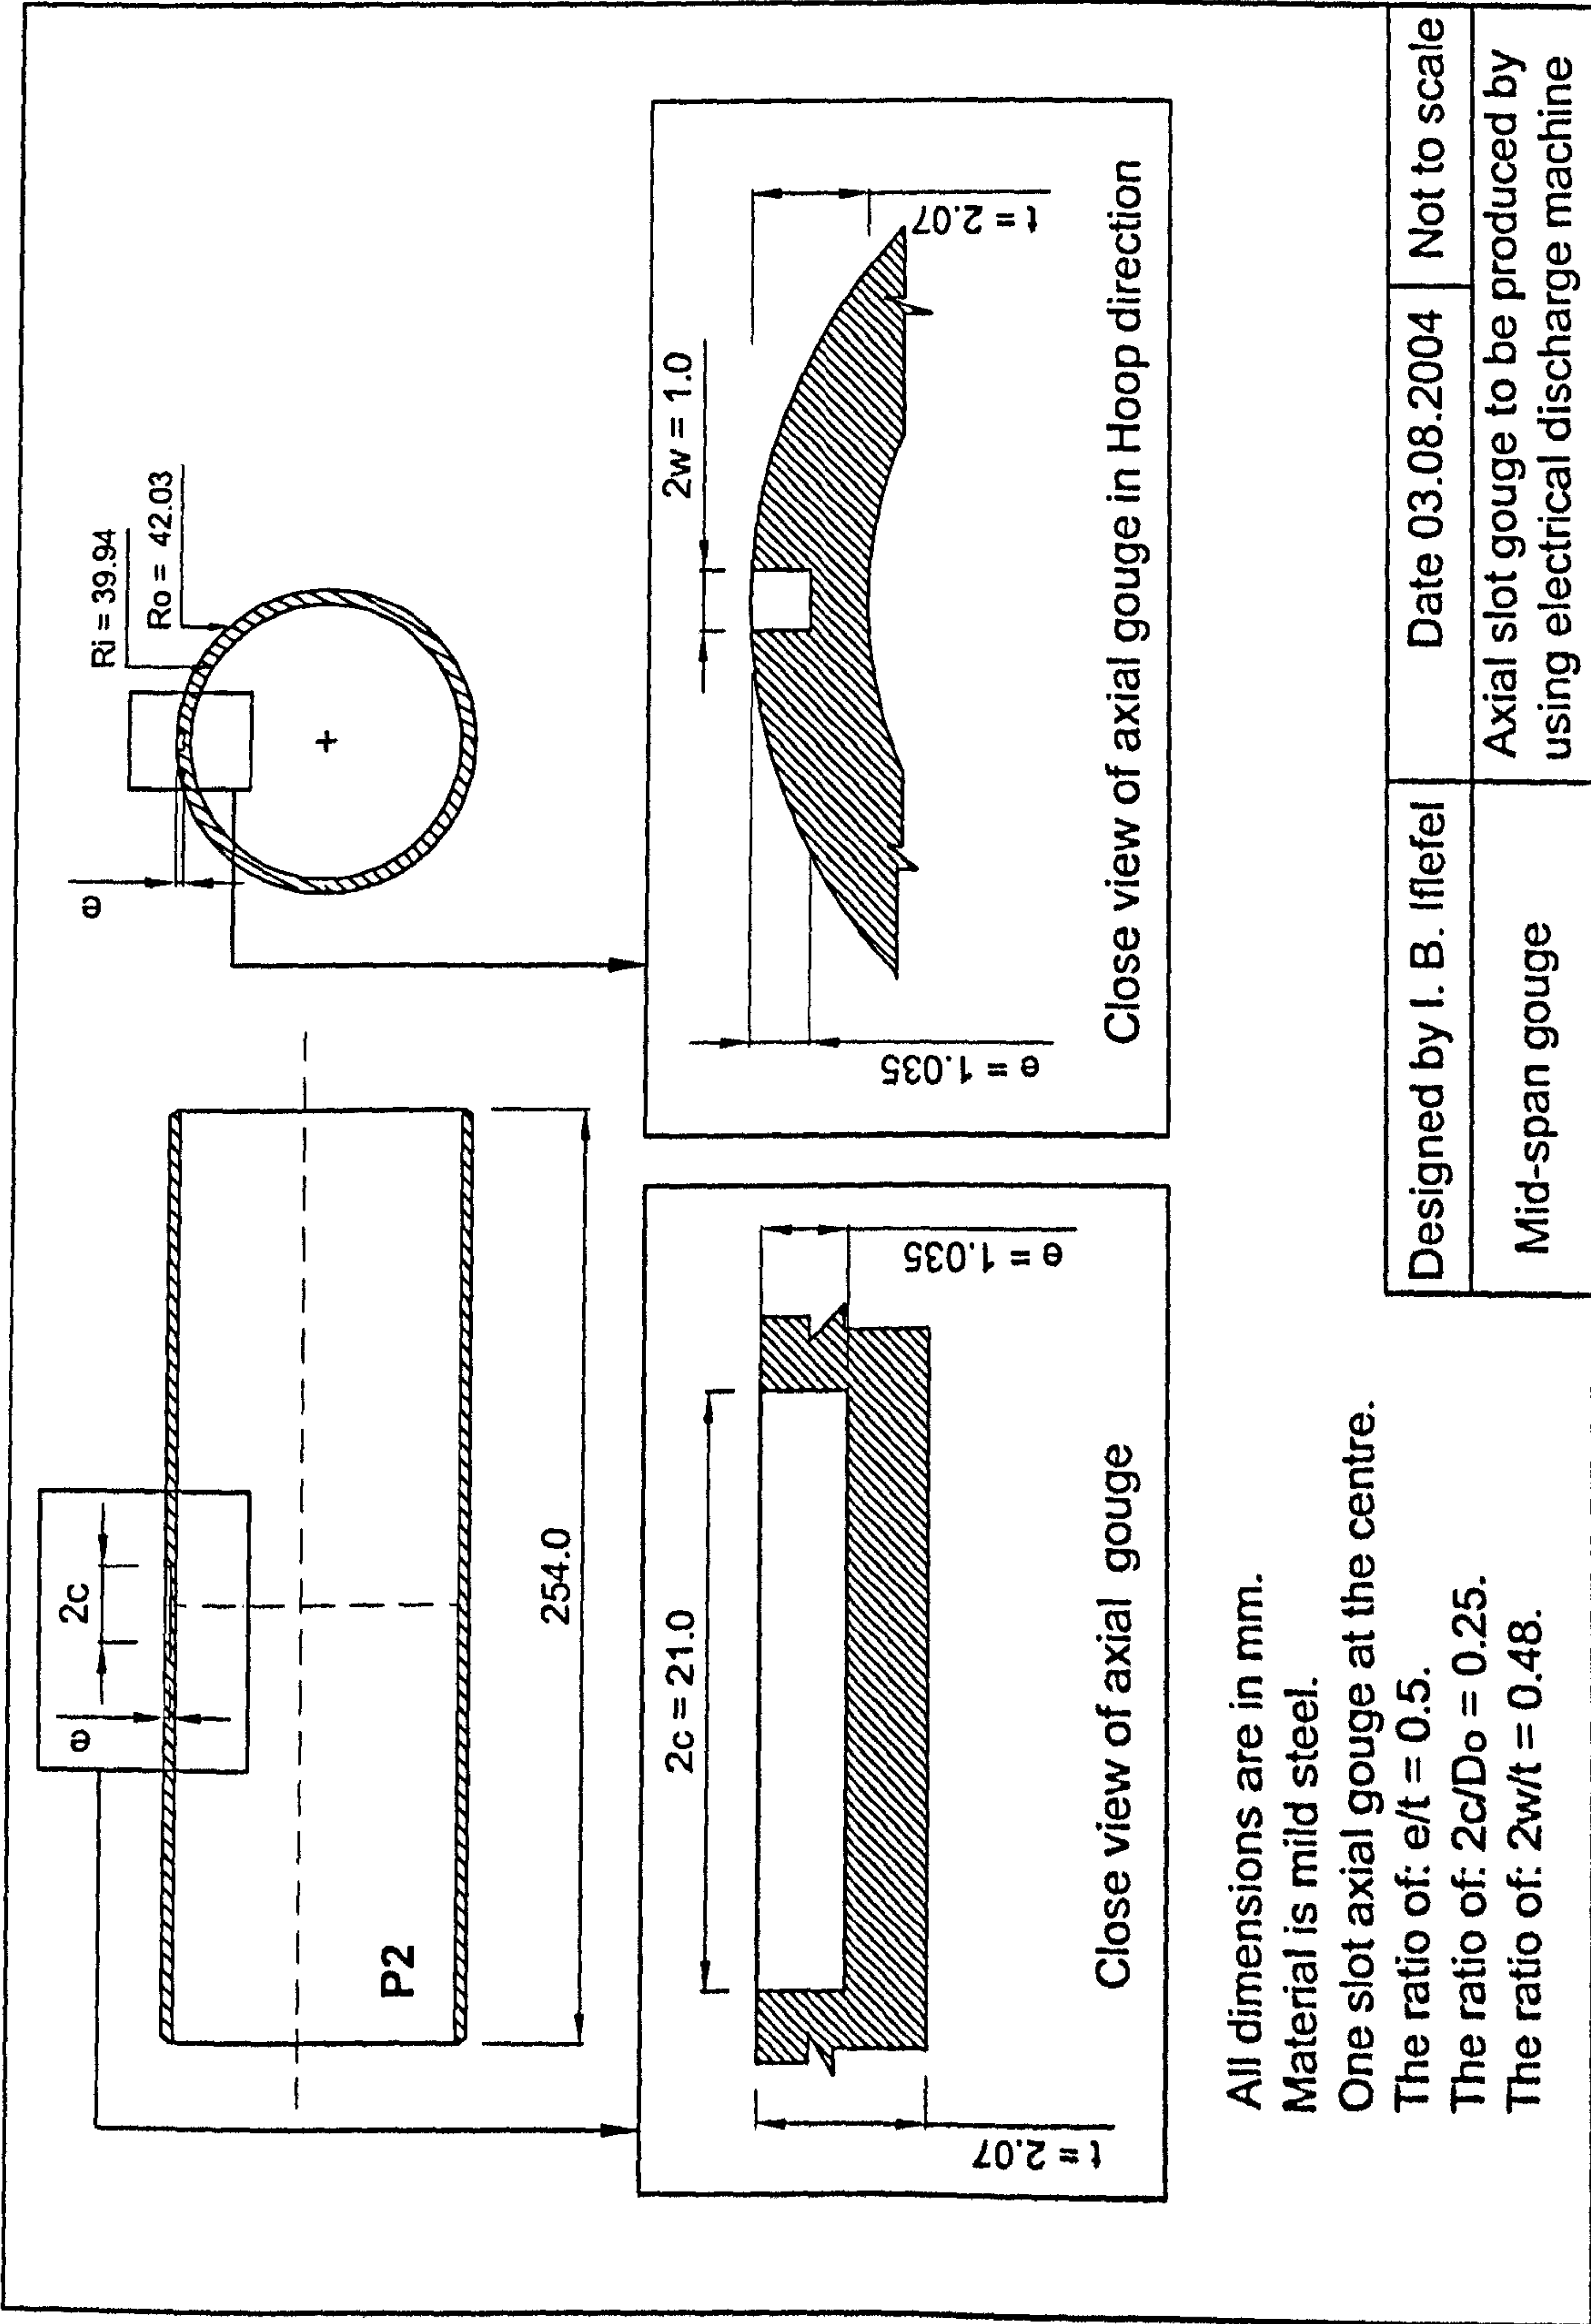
Sketch of the machined axial gouge at mid-span to be created by using electrical discharge machine (in part P2 of model SP4).
